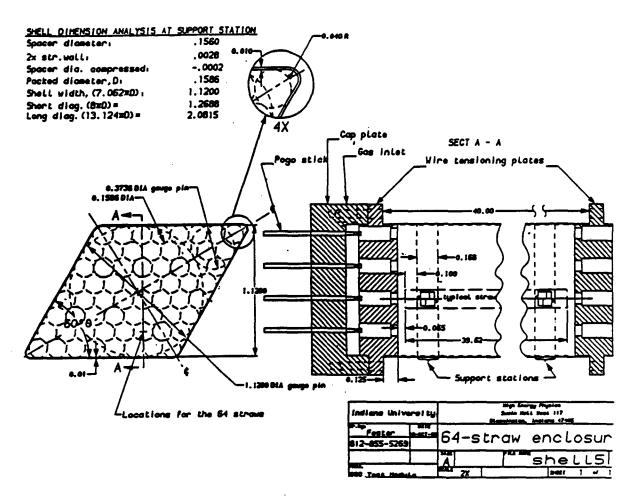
Assembly drawing of the 64 straw prototype module.
